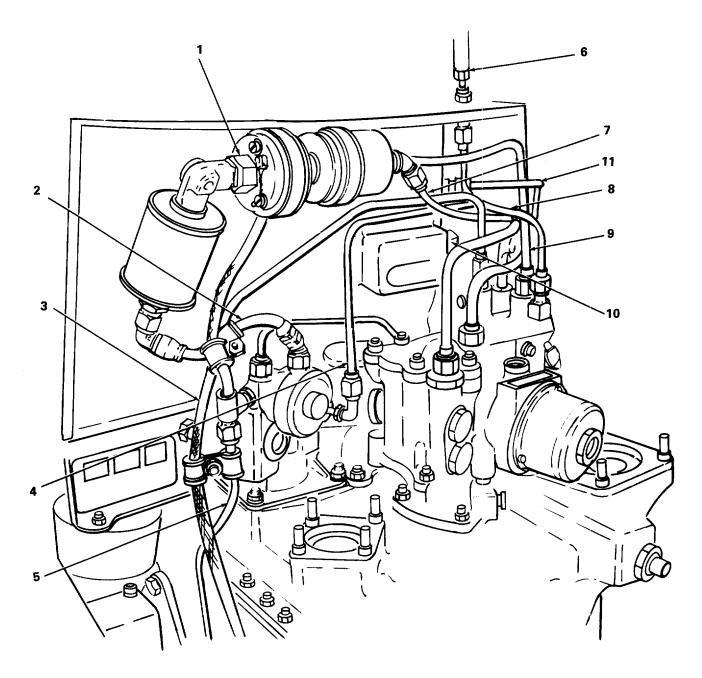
Fuel, Oil, and Air Tubing Parts Requiring Special Torque Values (Sheet 1 of 2)
